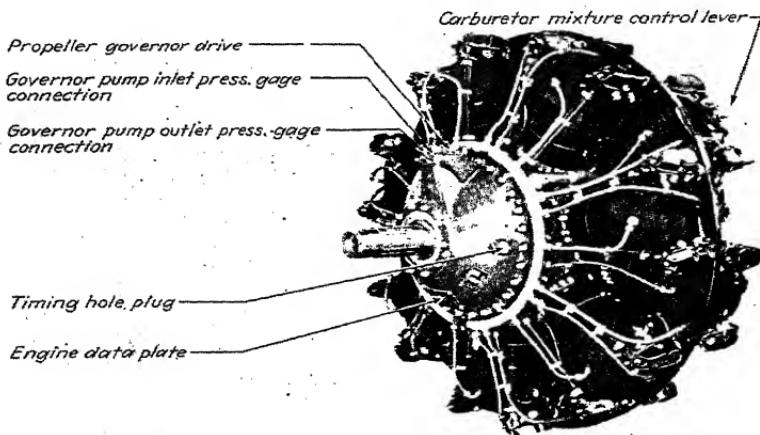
Three-quarter left front view of Wright 14-cylinder Cyclone engine.
